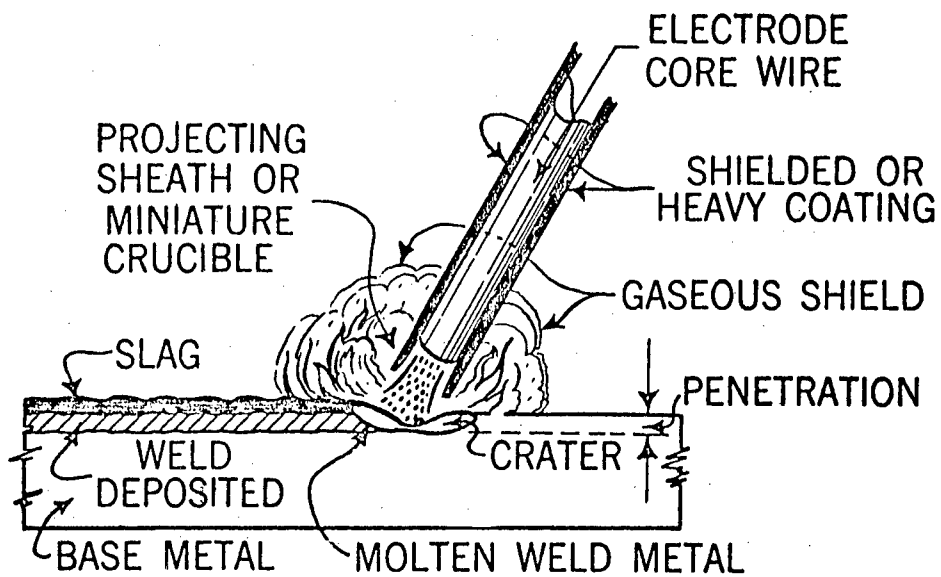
Arc Zone in Manual Metal-Arc Welding
